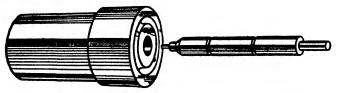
INJECTOR NOZZLE BODY AND VALVE ELEMENTS
